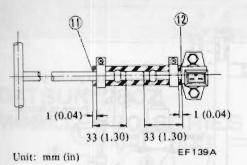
Fuel filter outlet to fuel pipe rubber hose
